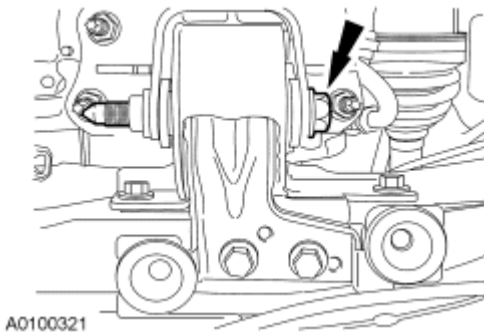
Locating Upper Transaxle Mount Through Bolt
